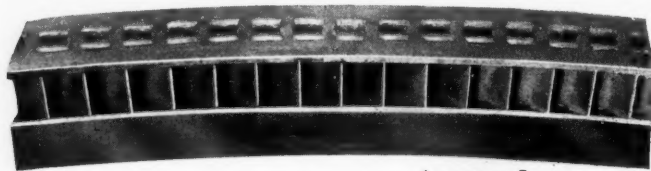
Bucket Segment after Enclosing Ring has been Riveted on.
